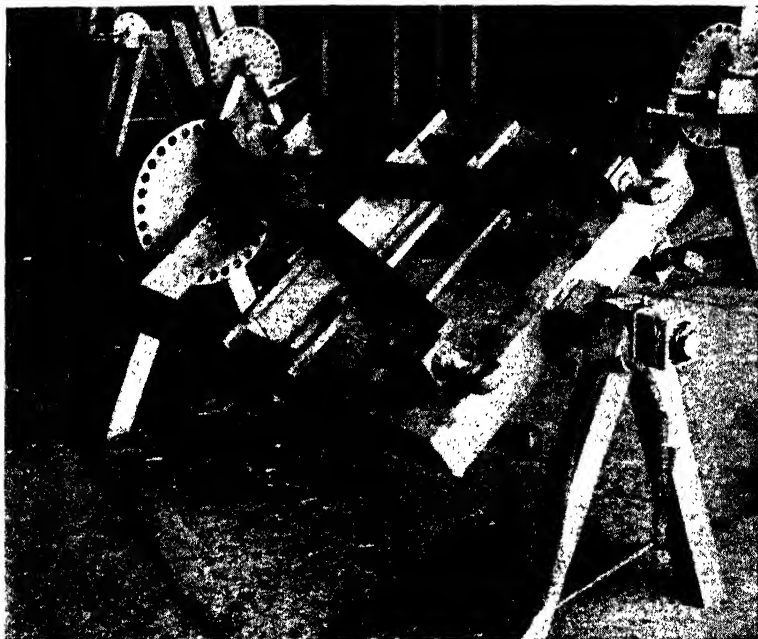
Building fixtures that speed up, standardize, and simplify setting-up and welding operations is an important welding engineering function that offers real sources of economy. (Note the use of premachined parts in this structure, and their protection from weld spatter drops by the fixture.) (Courtesy of R. G. LeTourneau, Inc.)
